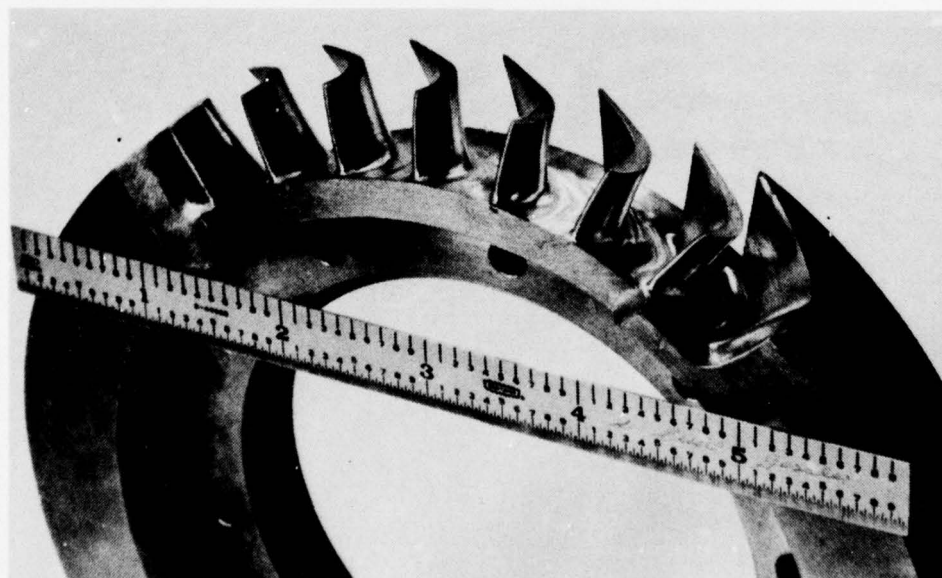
(b). Rotor Cascade - Reduced Solidity - Front View.
